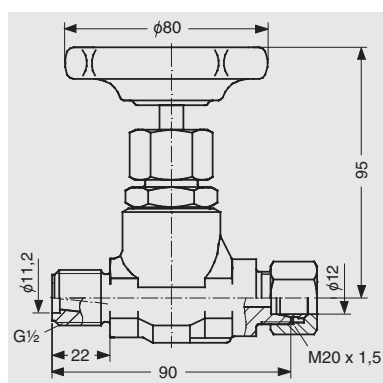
/111 Shut-off valves 7MF9017-1B, -2B, -3B, dimensions
